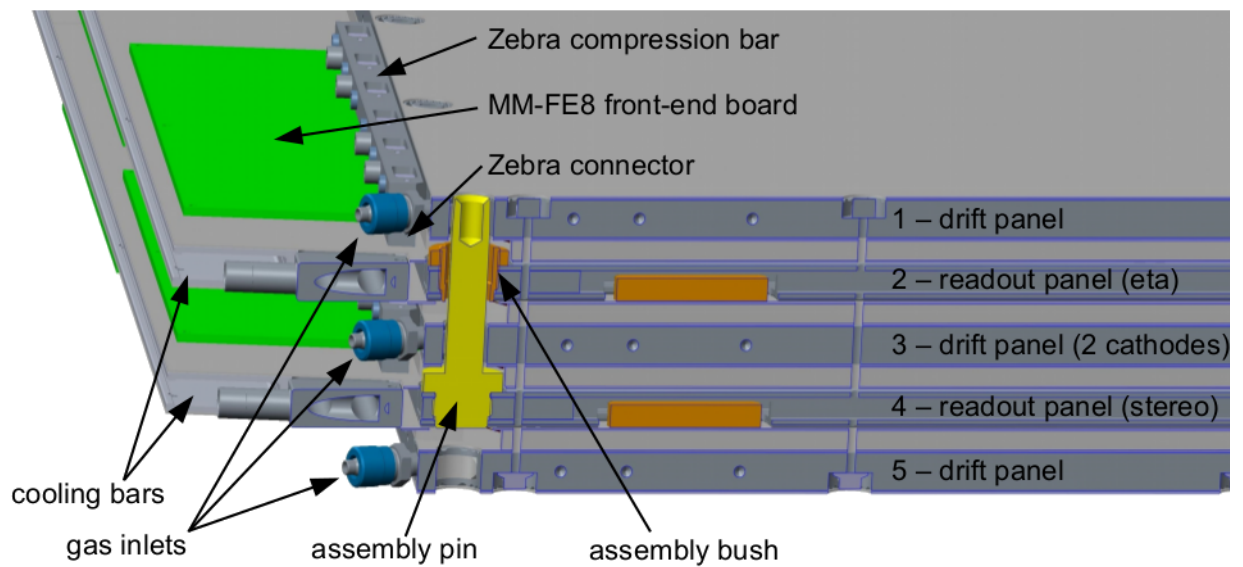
Cross section of an assembled quadruplet. Two dedicated assembly pins and assembly bushes are used to conserve the perfect alignment of the two readout panels after assembly. Figure taken from [Lösel, 2017].
